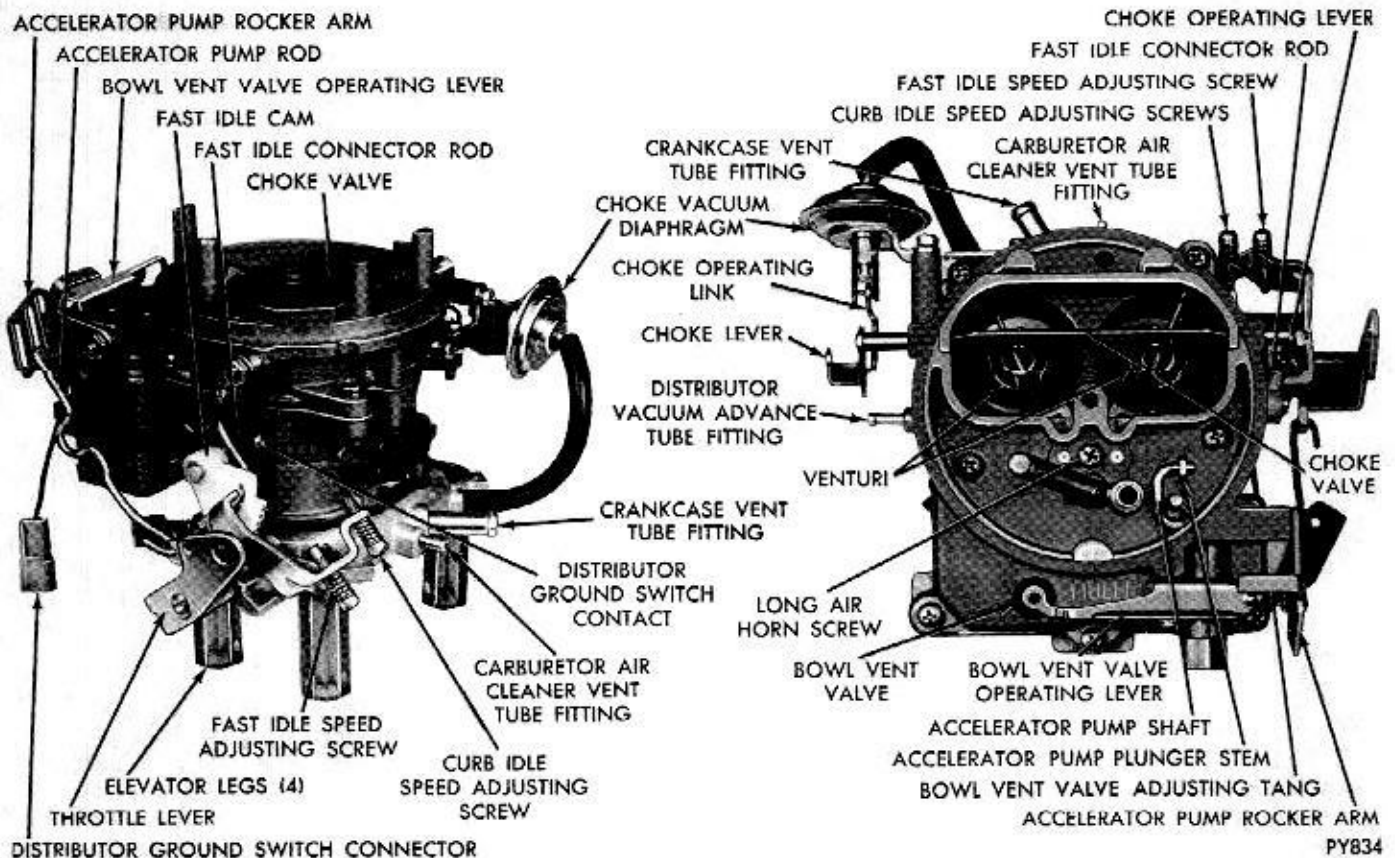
Carburetor Assembly (Holley 2210 Series)
